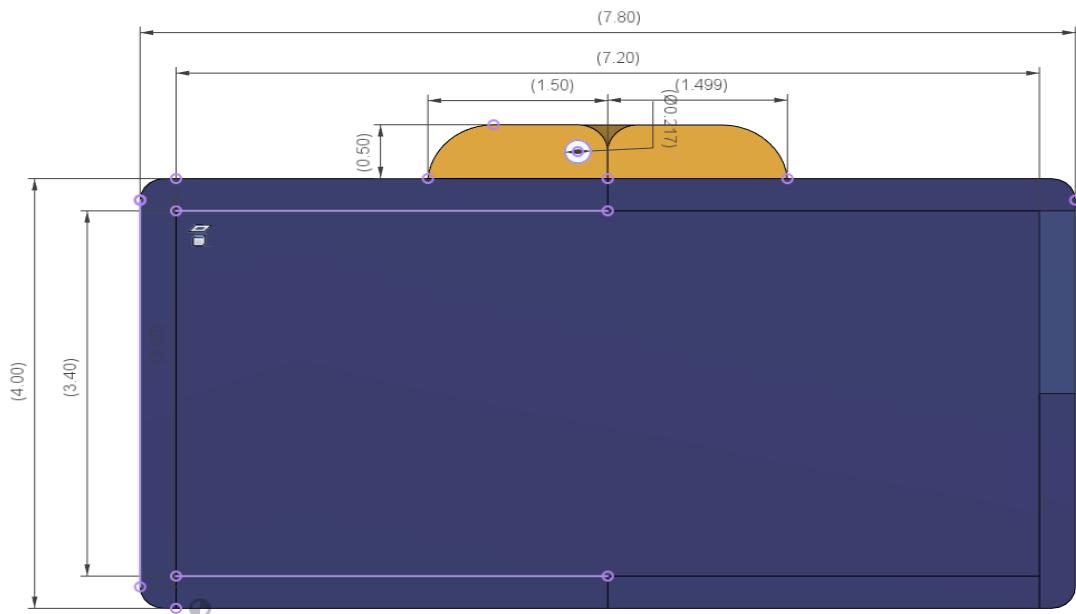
Dimensions Red-reflex Enclosure (Front View)
